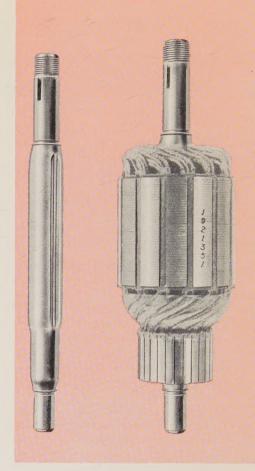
A sample hollow shaft of welded sheet steel and an assembled generator armature. This shaft made possible savings in material costs while yielding the required performance. The successful design and manufacture of such a shaft demonstrates the effectiveness of design and production departmental cooperation.
